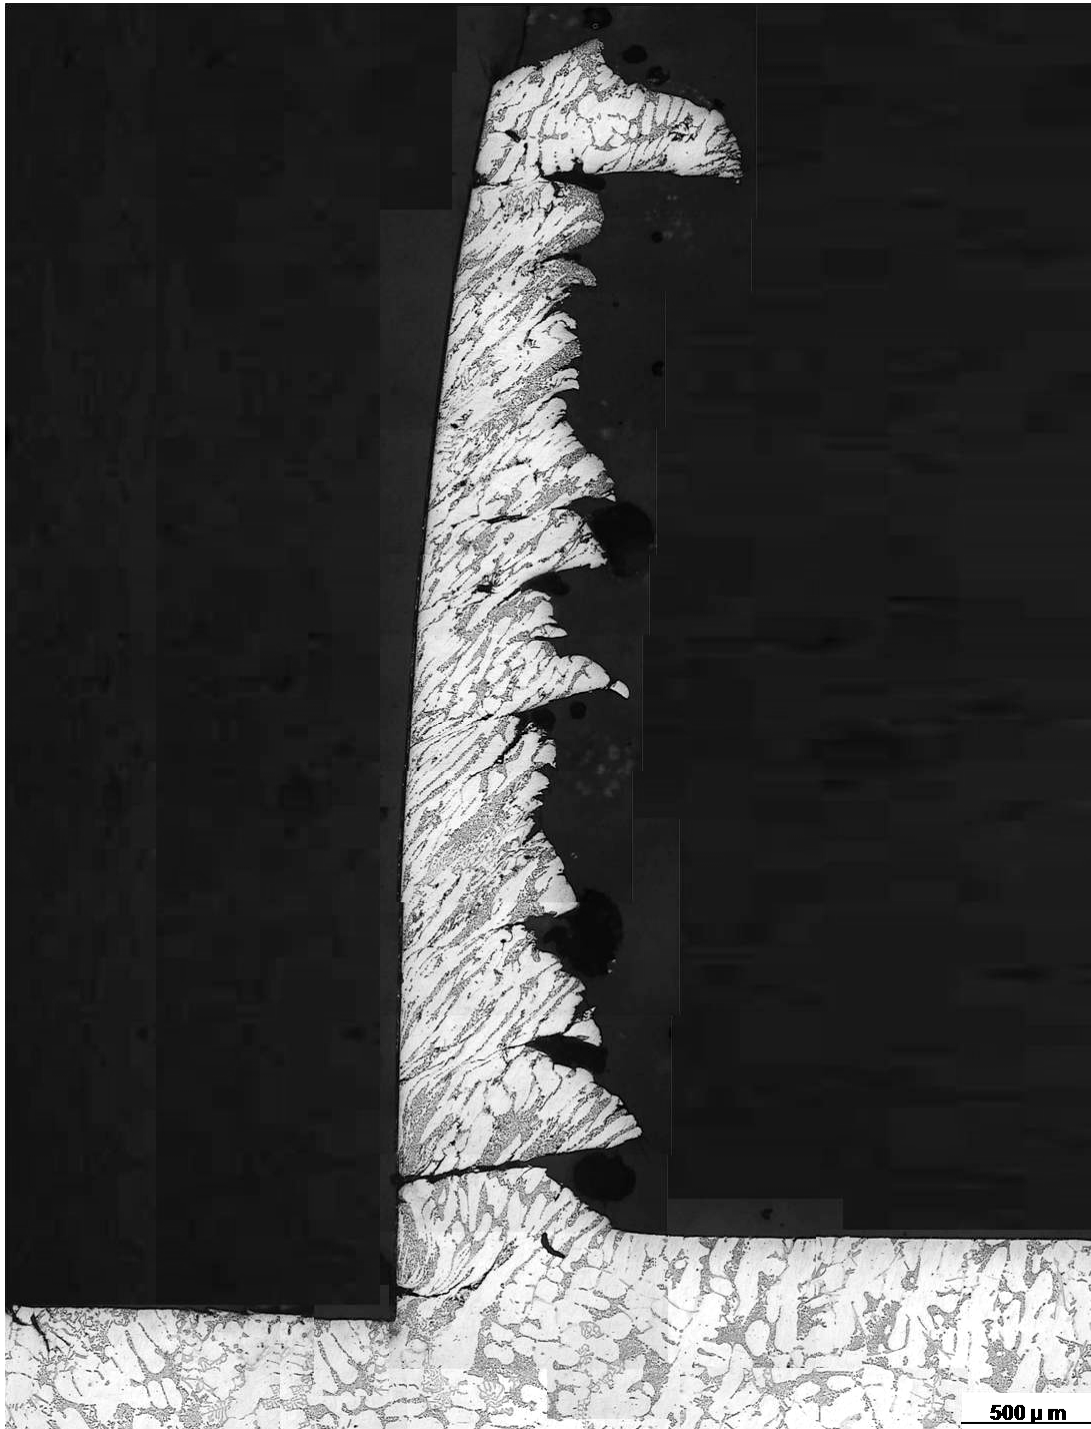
Cutting Speed 25m/min, Feed 0.35mm
